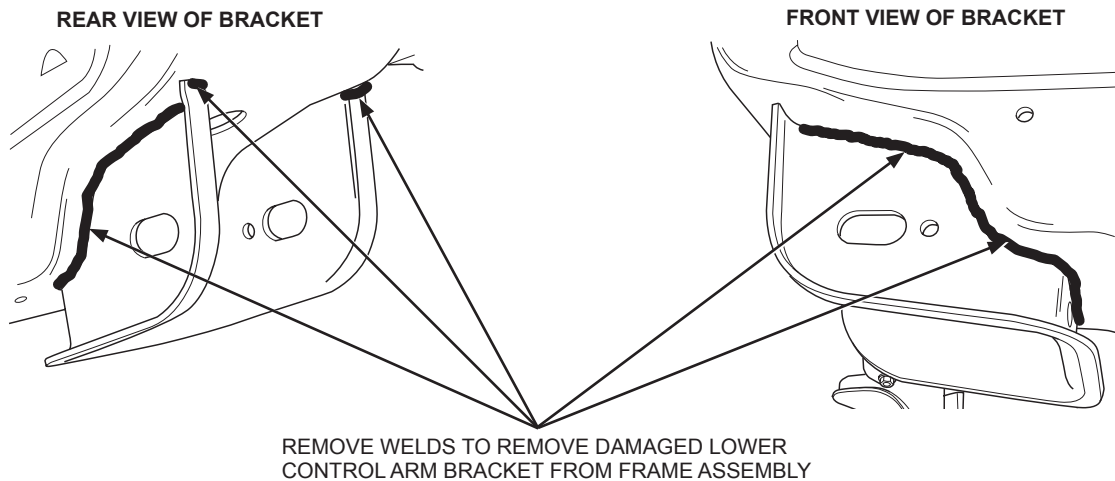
GRIND WELDS SHOWN TO REMOVE DAMAGED LOWER CONTROL ARM BRACKET, DO NOT GRIND INTO THE CROSS MEMBER MATERIAL WHEN REMOVING THE LOWER CONTROL BRACKET FROM THE FRAME, RH SHOWN, LH SYMMETRICALLY OPPOSITE
